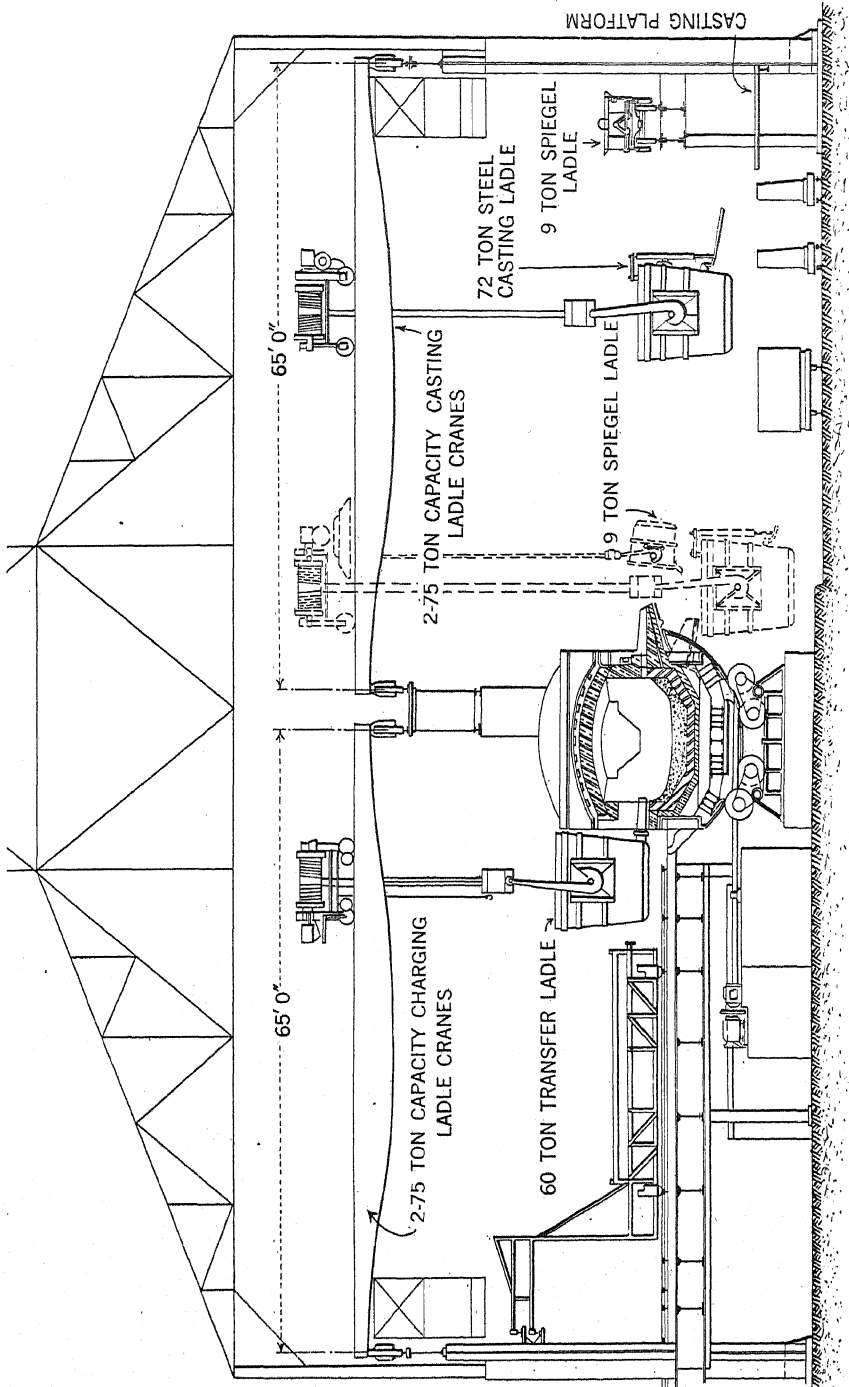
SECTION OF THE OPEN-HEARTH PLANT.
